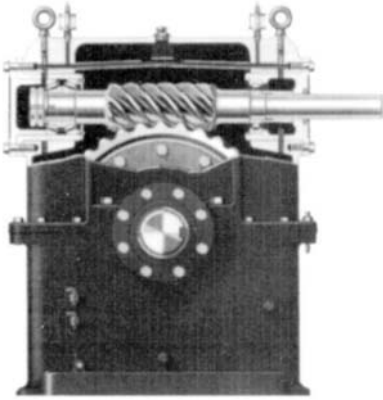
Photograph of a worm-gear speed reducer. Notice that the gear partially wraps, or envelopes, the worm. (Cleveland Worm and Gear Company.)
